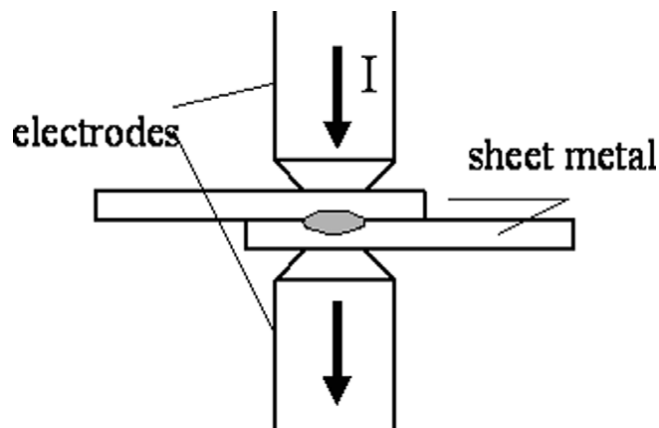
Resistance spot welding process illustration [6]
